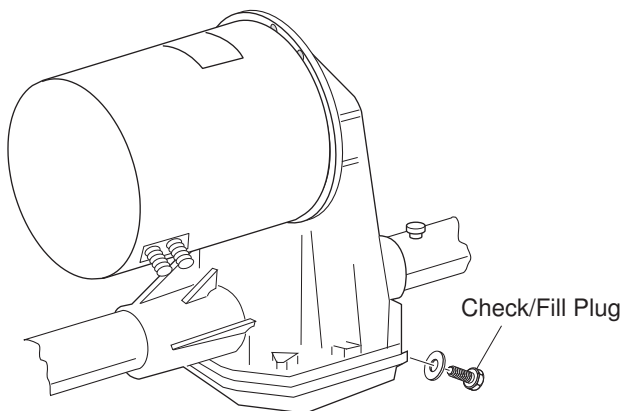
Add, Check and Drain Rear Axle Lubricant
